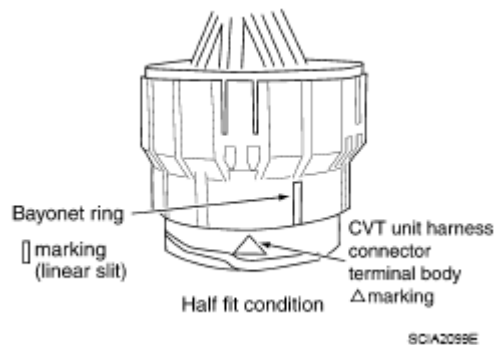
Identifying CVT Unit Harness Connector Terminal Body Marking With Bayonet Ring Marking
